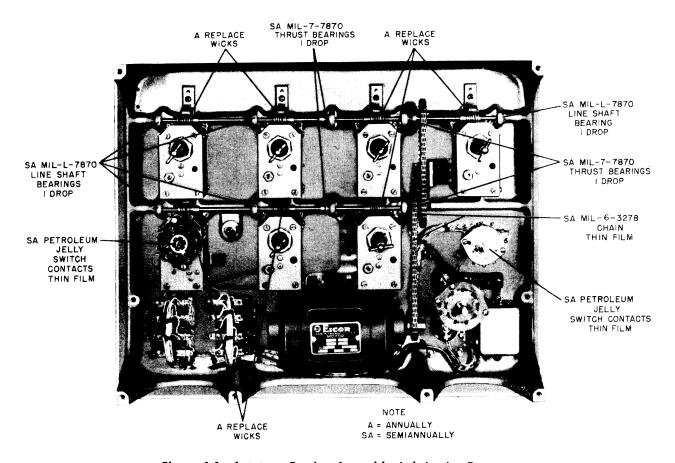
Autotune Casting Assembly, Lubrication Data
